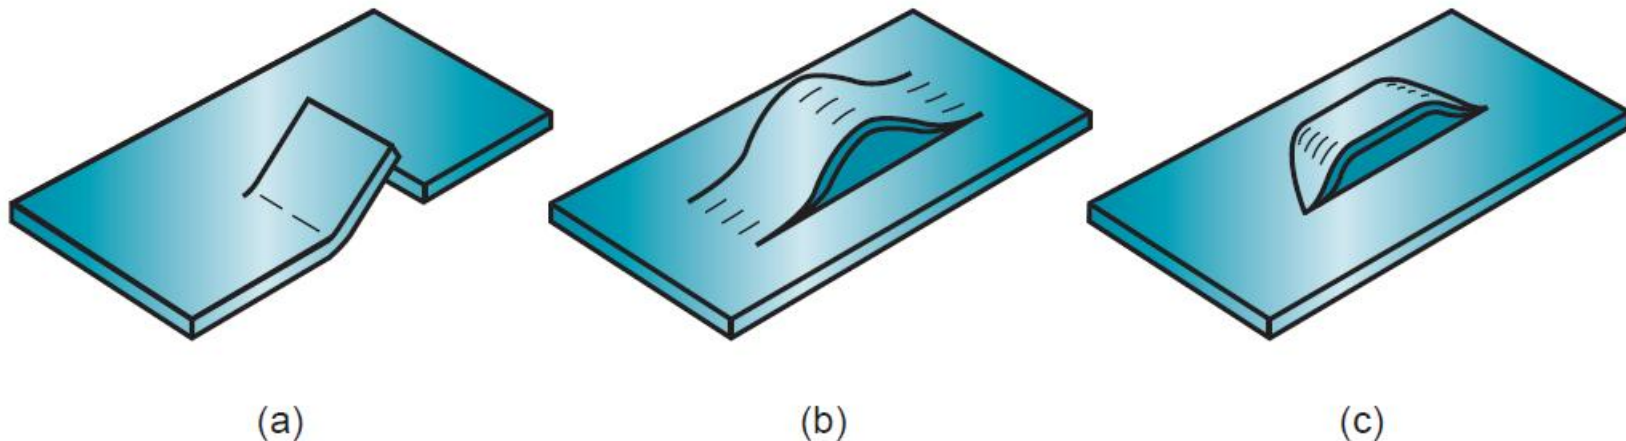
Lancing in several forms: (a) cutting and bending; (b) and (c) two types of cutting and forming.
